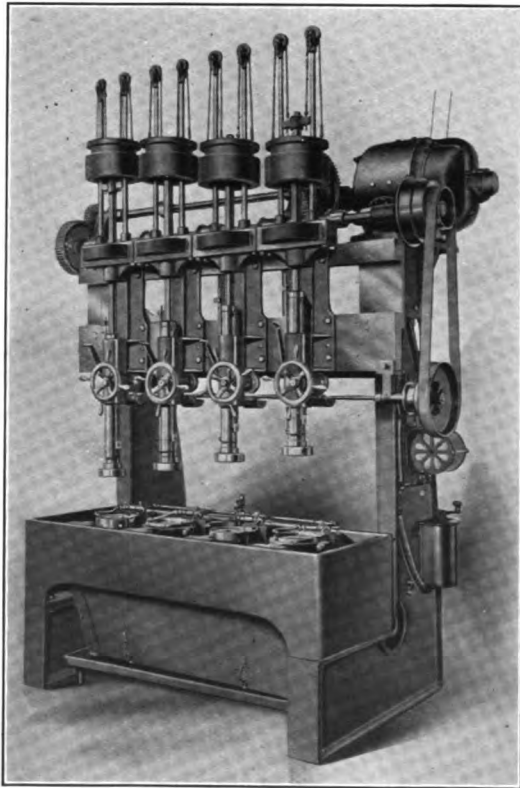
LASSITER STRAIGHT AND TAPER BOLT-TURNING MACHINE.
